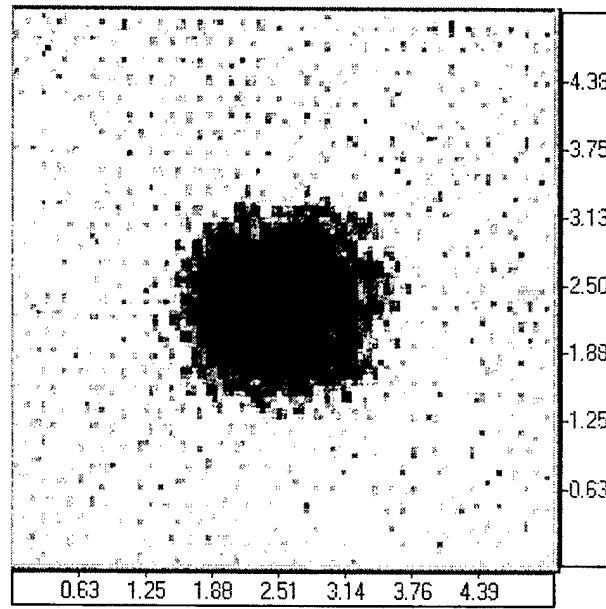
TYPICAL TTU C-SCAN IMAGE OF A DAMAGED SANDWICH PANEL
